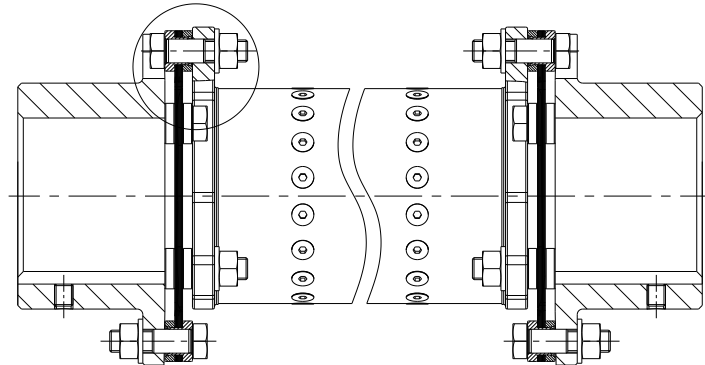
Assembly of lamina sets, RADEX®-N size 85 - 115
